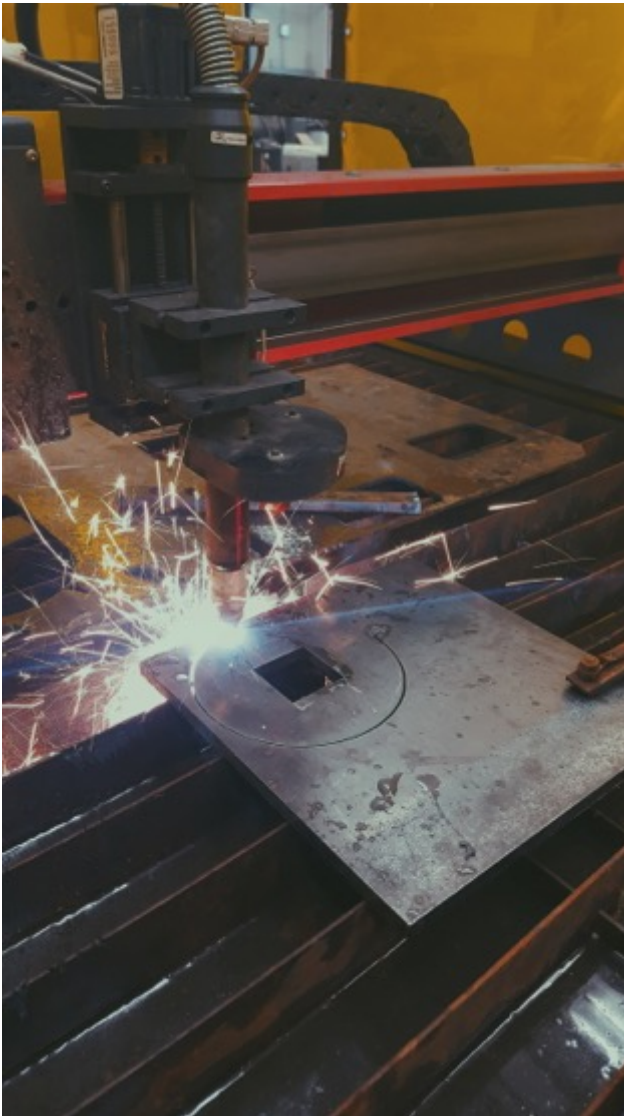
CWU Plasma table cutting out 5x5 lug plate (Appendix B12: Drawing)
